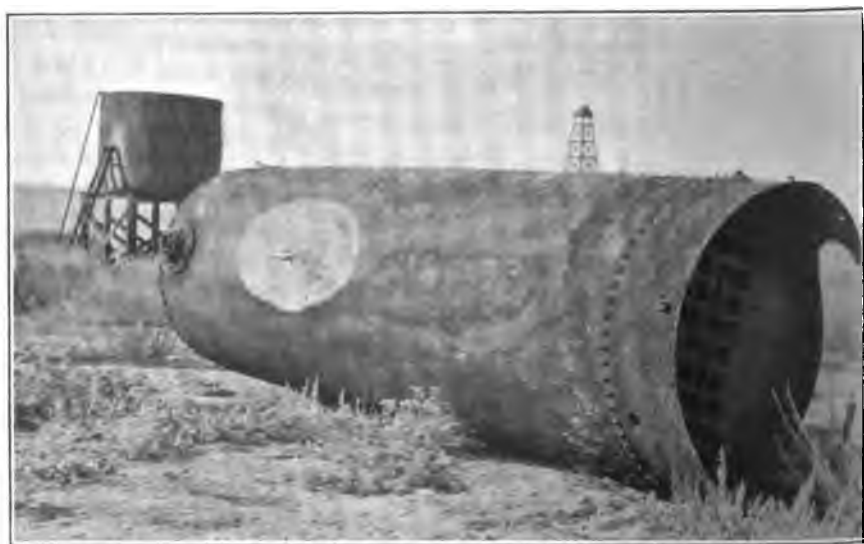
BURNT-OUT BOILER, SHOWING BAGGING.
